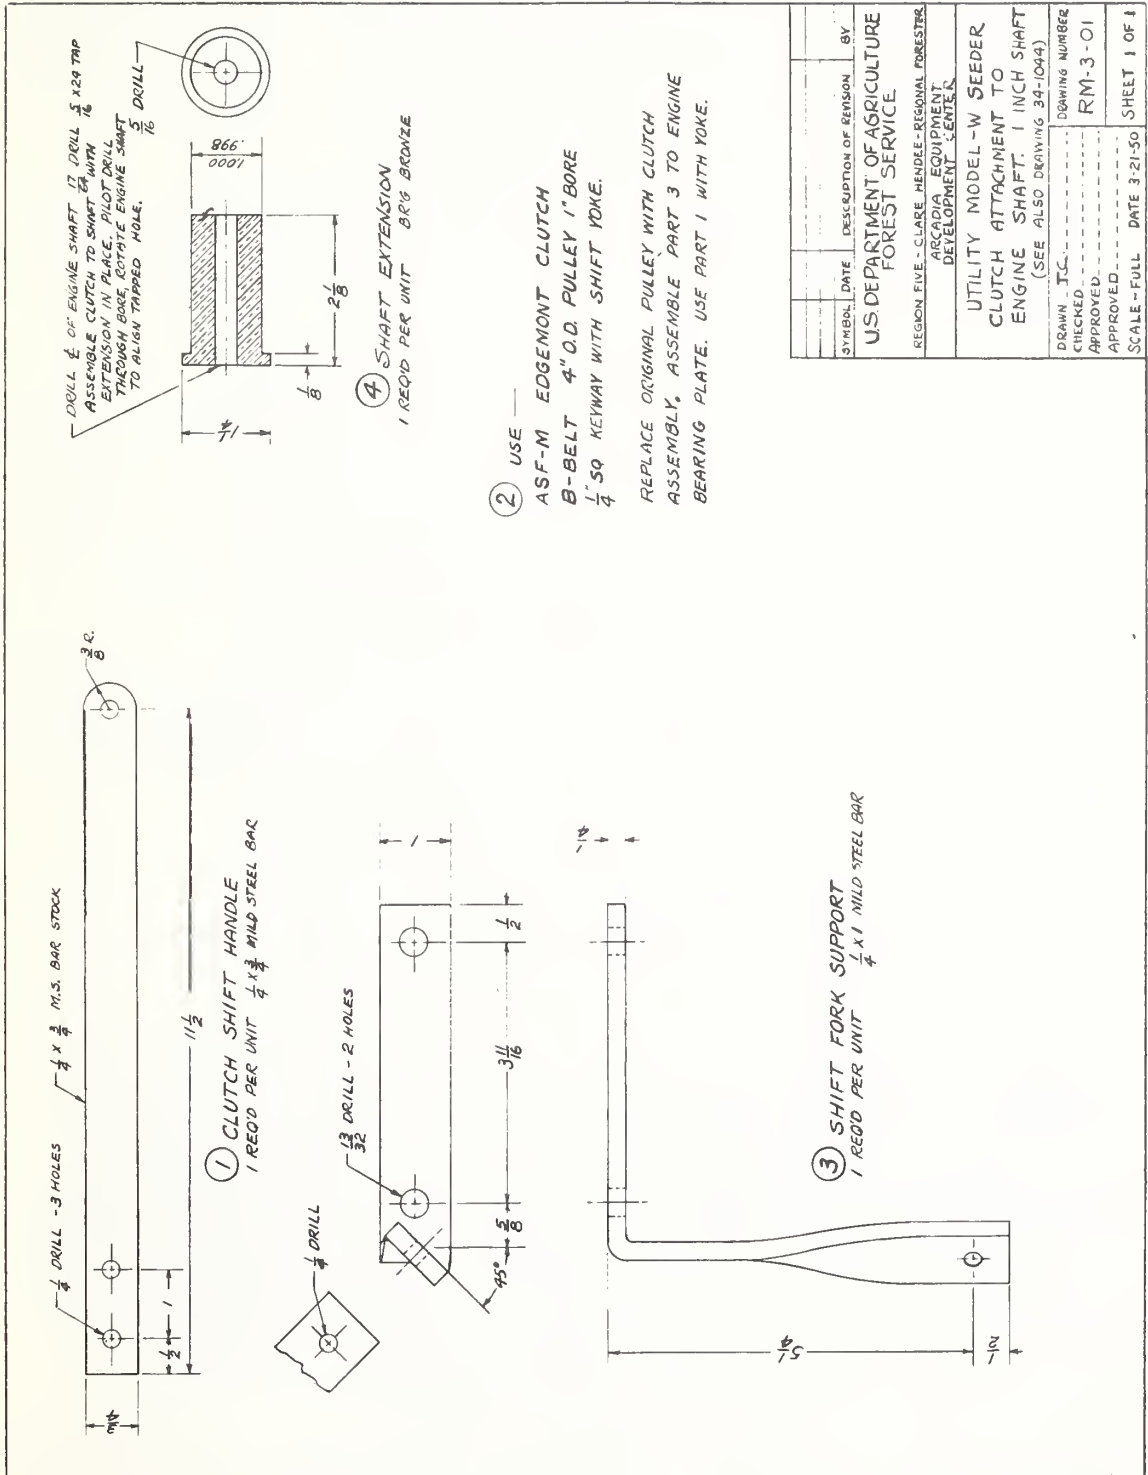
Utility model-W seeder clutch attachment to engine shaft.
